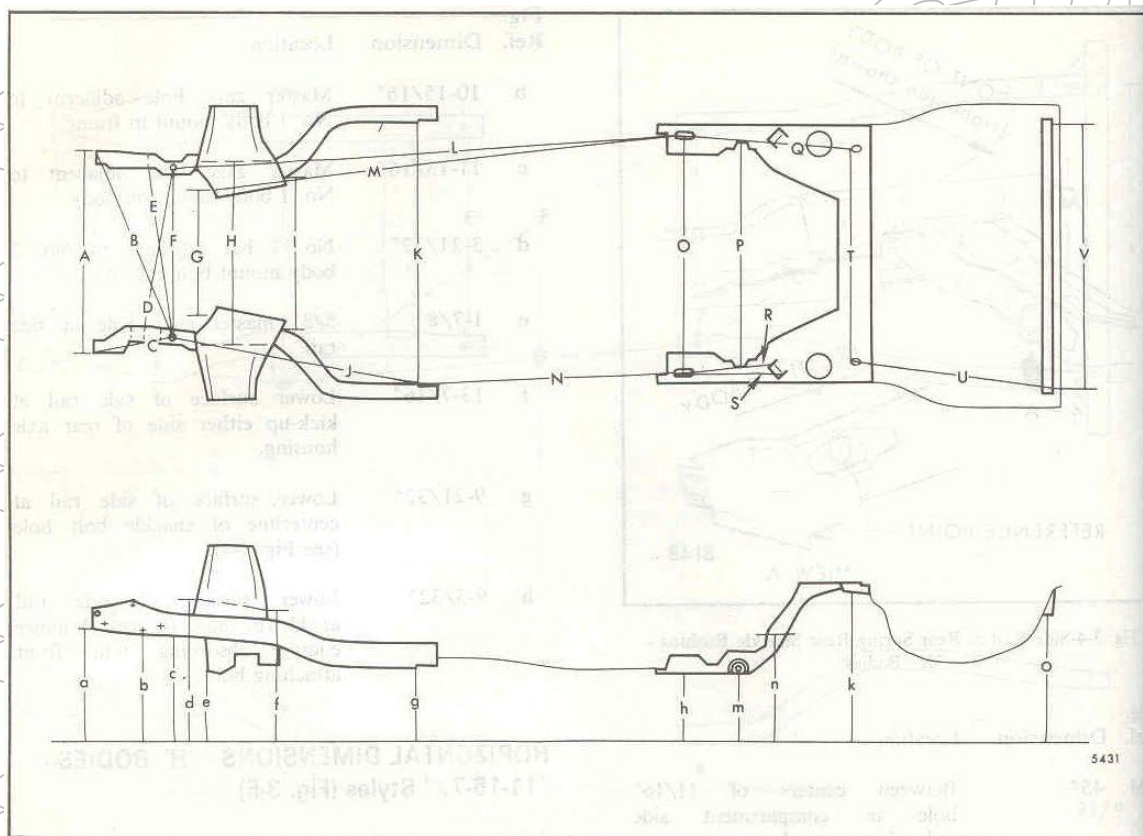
Horizontal and Vertical Checking Dimensions - "H-11-15-77" Styles
